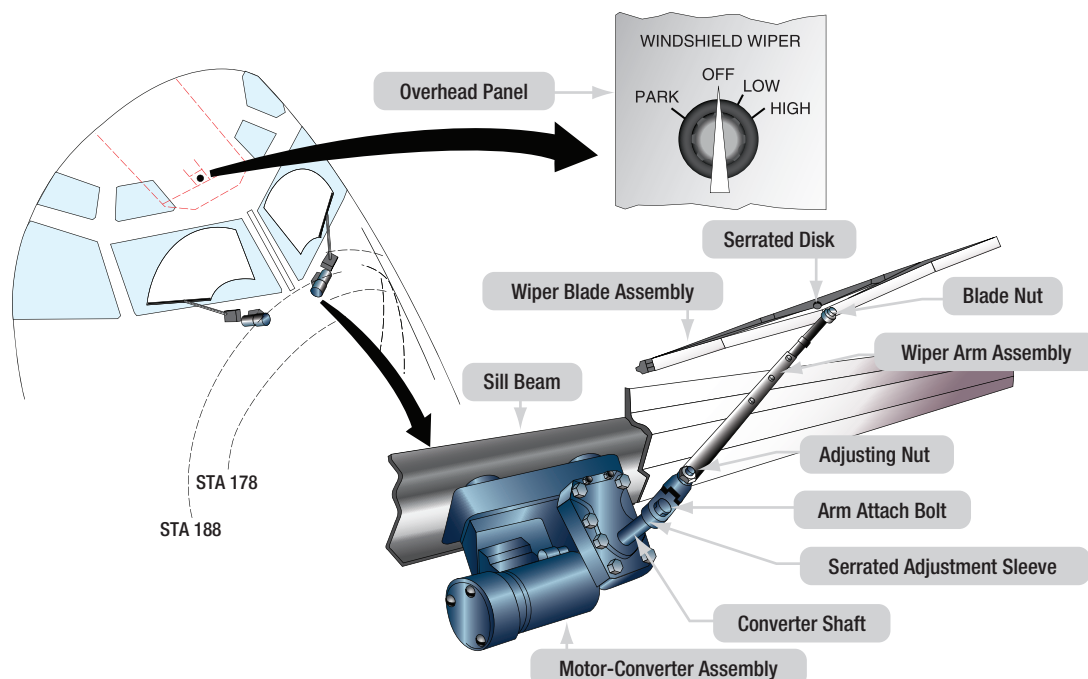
Windshield wiper assembly/installation on a transport category aircraft. The motor-converter is mounted under the aircraft skin.
